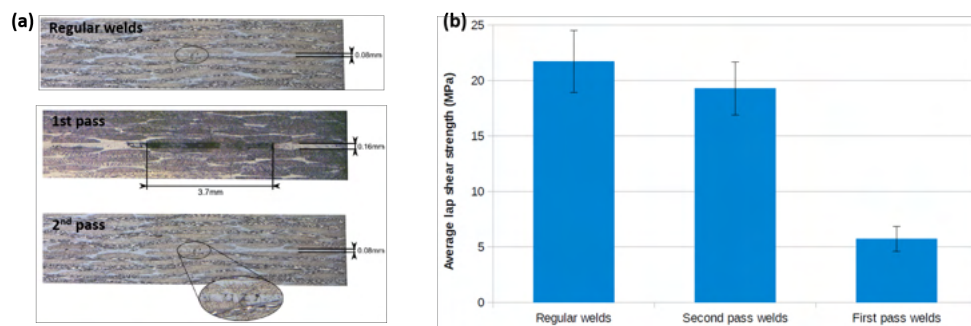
Optical microscopy of cross section of 3 welding configurations (standard US welding, one-pass welding and two-passes welding) (a) Single lap shear test results for each configuration on CF/PPS specimens (b) [Van Beurden, 2015]
